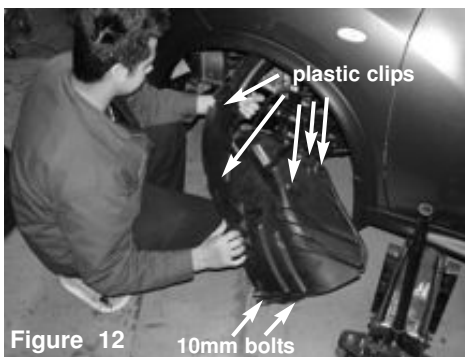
Remove 5 plastic clips and 2-10mm bolts to from the wheel well cover to pull back to access the bumper cavity.
